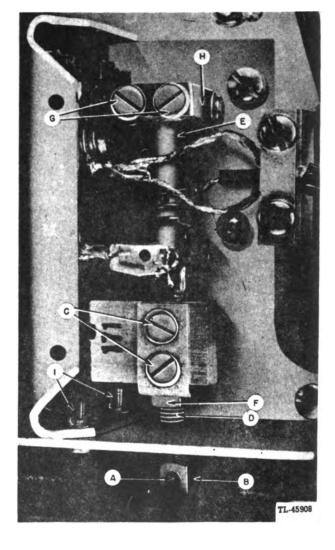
Transmitter-Receiver RT-48A/TPX-1, receiver chassis, typical r-f tuning assembly.
